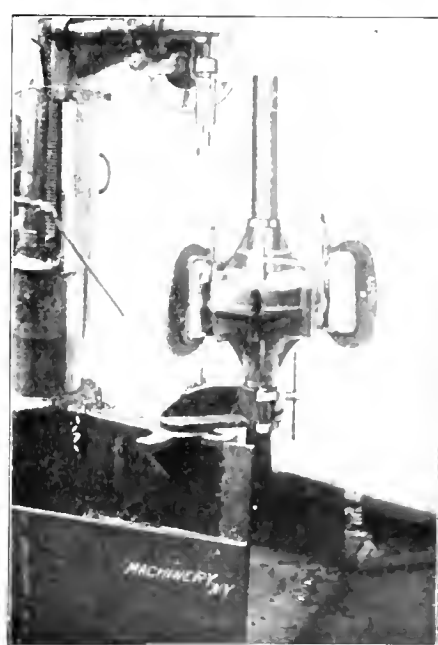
Drilling Bolt Holes in the Differential Gear Case
